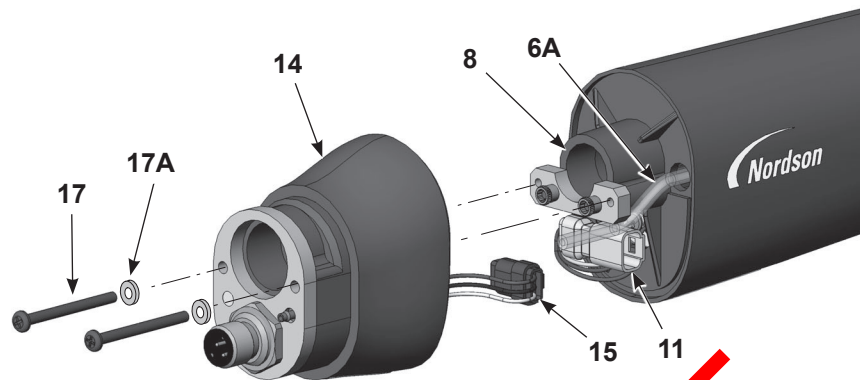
Tube-Mount Gun Disassembly 3 of 5
